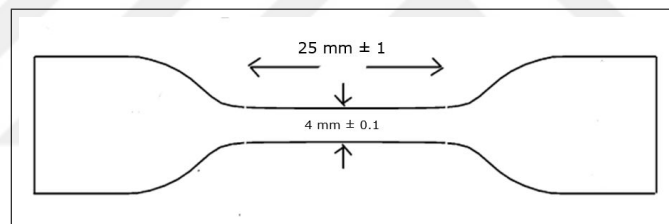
Dimensions of the dog-bone tensile test specimen.
